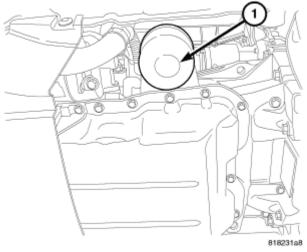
Oil Filter Courtesy of CHRYSLER LLC
